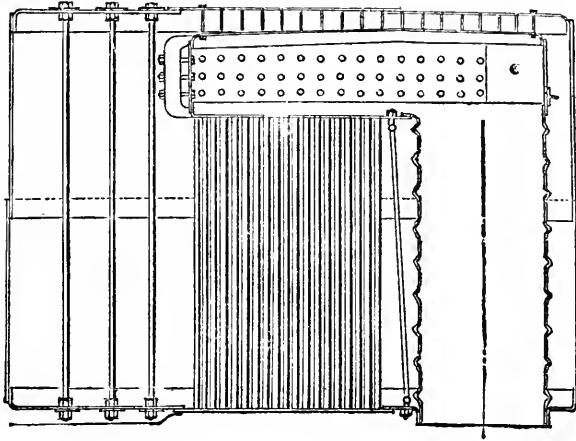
Four-Furnace Cylindrical Boiler with Two Combustion Chambers.
